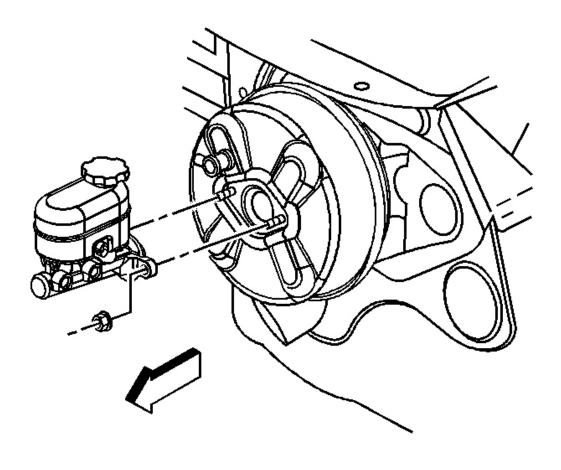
View Of Master Cylinder & Booster Courtesy of GENERAL MOTORS CORP.
